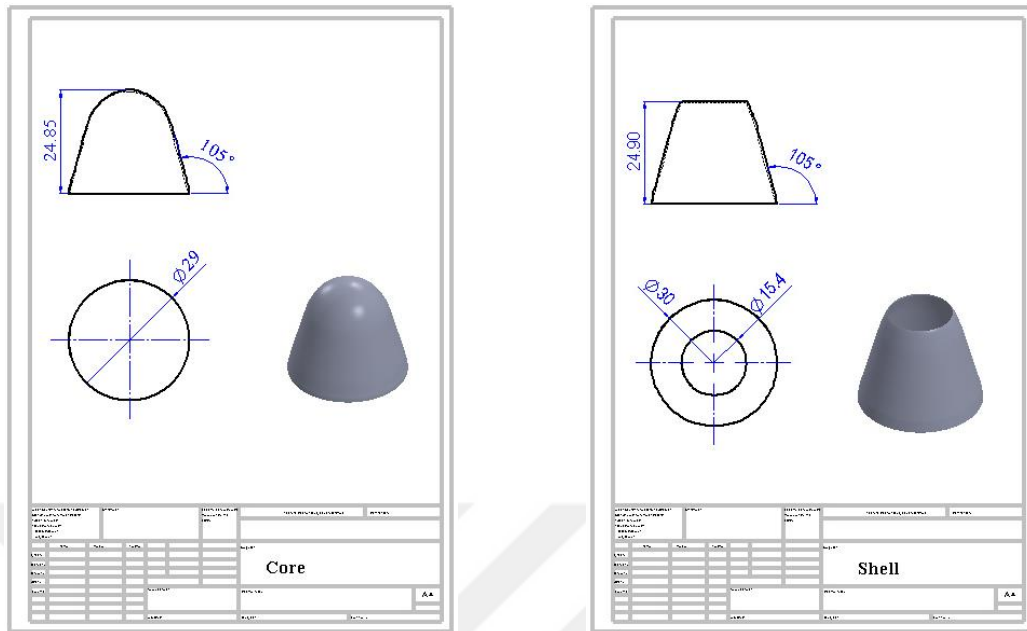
Technical drawings (mm) of (a) the inner core and (b) the outer shell.
